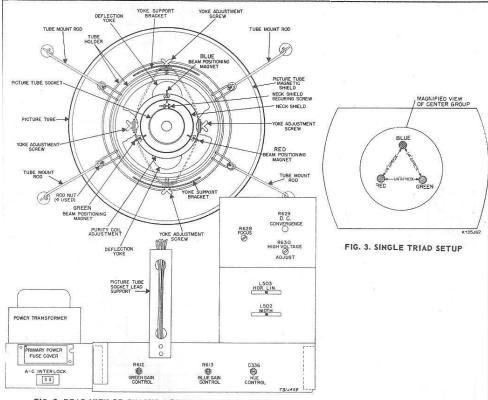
REAR VIEW OF CHASSIS & PICTURE TUBE ASSEMBLY
